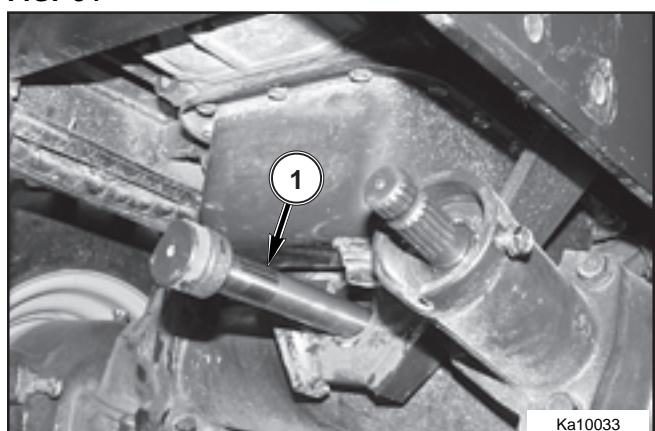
Disconnect the two hoses connected to the steering cylinder. Mark the hoses prior to removal to aid in assembly. Support the front axle, remove the front wheels and slide the front axle out from under the tractor.
